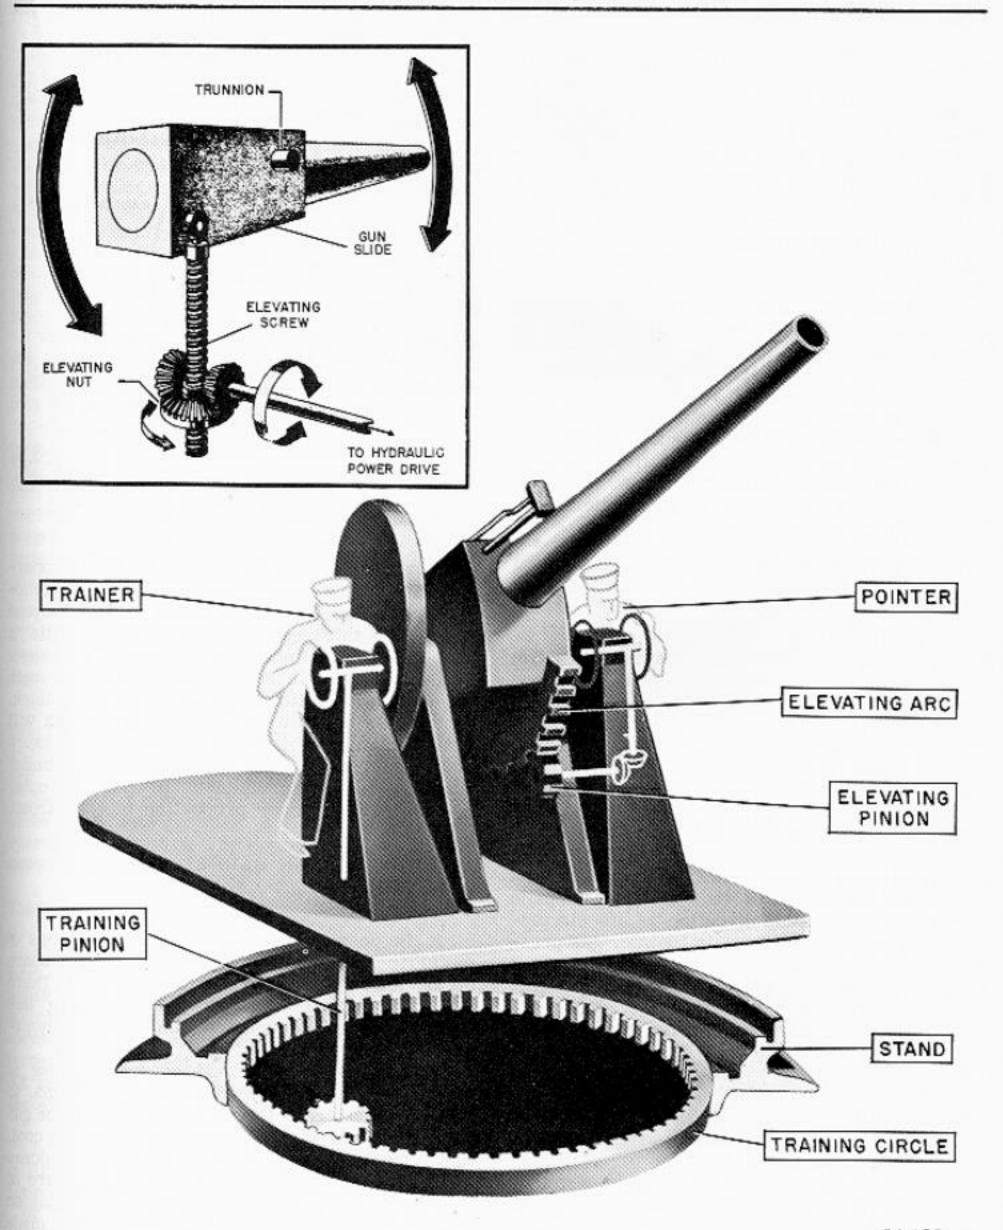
Training and elevating gear (simplified). (Insert: Screw-type elevating gear.)
